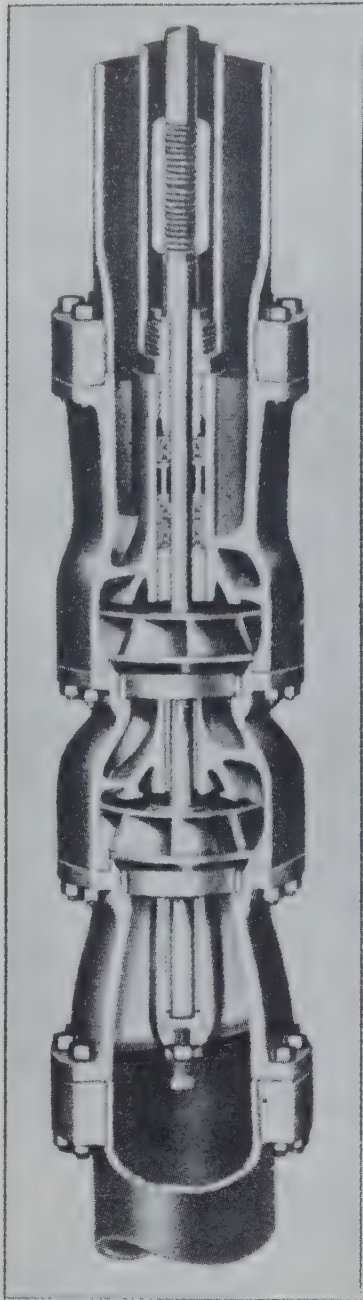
Longitudinal cutaway view of two-stage deep-well pump. (Layne and Bowler, Inc.)
